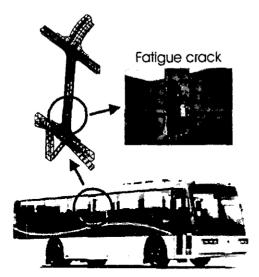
The shape of a bus window pillar member and typical fatigue crack
